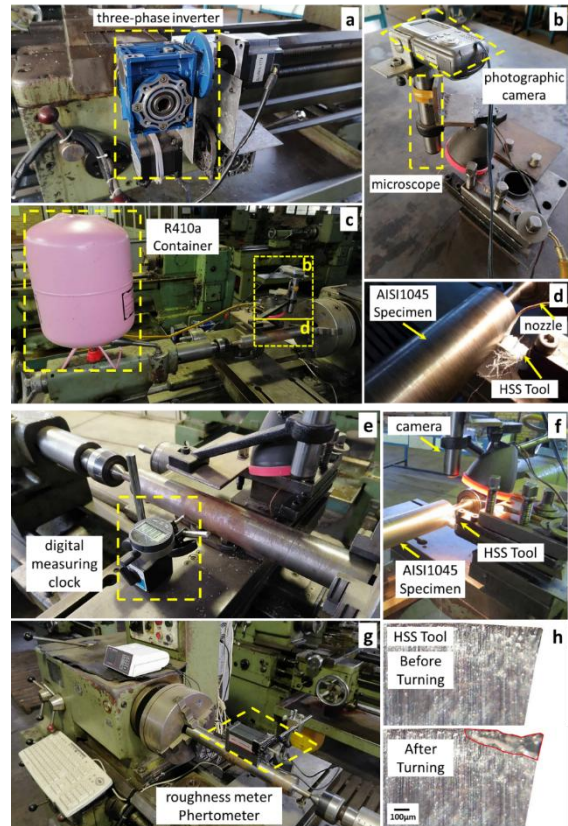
(a) Installing three-phase inverter, (b) Installing a photographic camera on a microscope placed on a lathe, (c) and (d) Installing nozzle for applying R410a coolant fluid.contiued. (e) Installing digital measuring clock holder base, (f) Installing roughness meter Phertometer holder base, (g) and (h) Recording and processing camera image.
